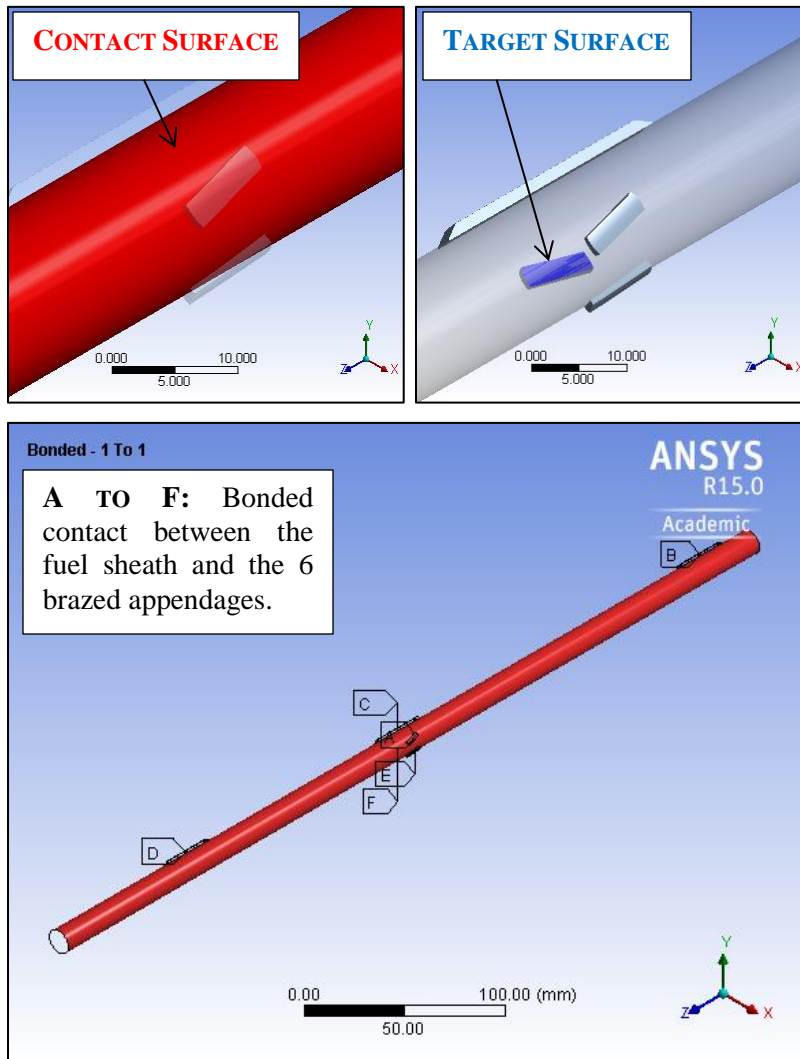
Contact pairs of the 3-D shell-solid assembly.
